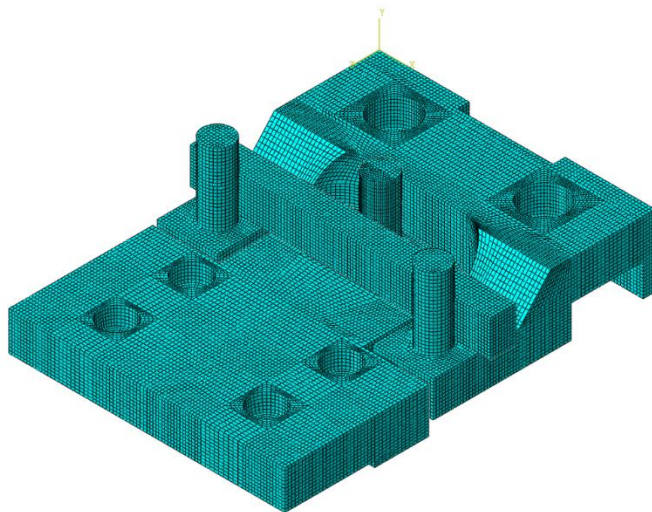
Meshed assembled bend test tooling with 4.25mm thickness specimen
